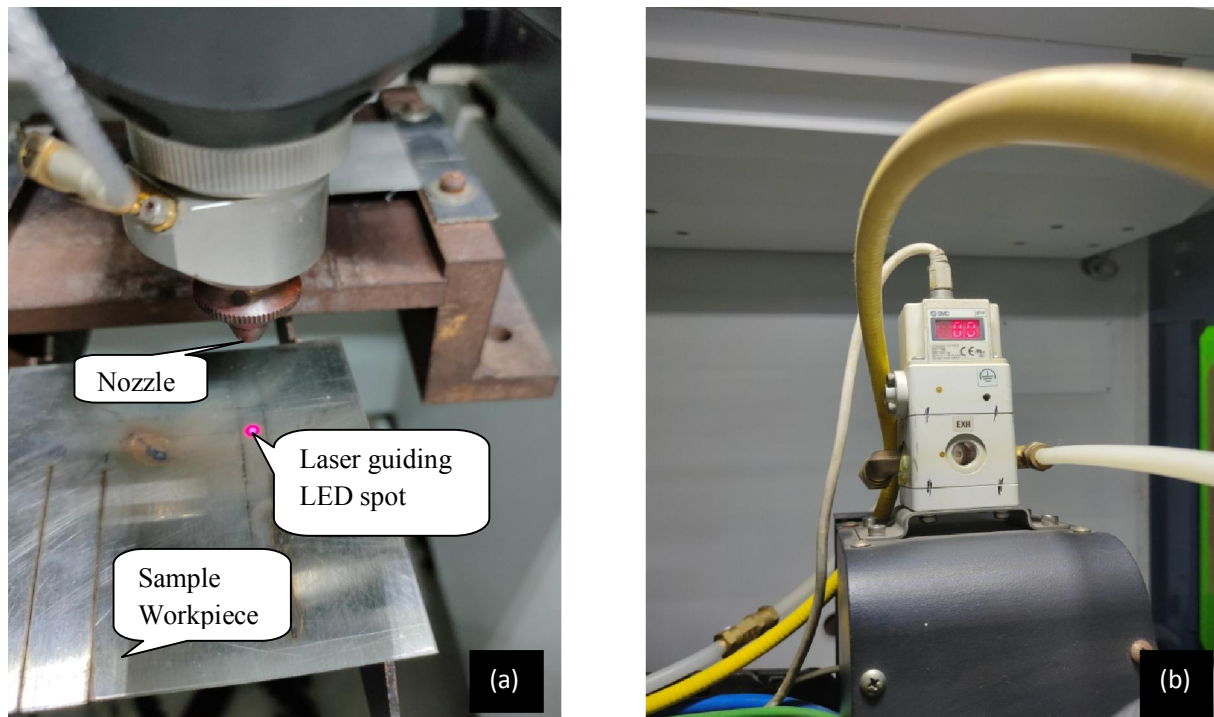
(a) photographic view of nozzle, laser shutter and workpiece, (b) photographic view of assist gas pressure display.
